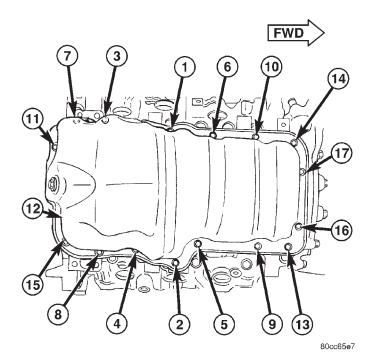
OIL PAN MOUNTING BOLT SEQUENCE
